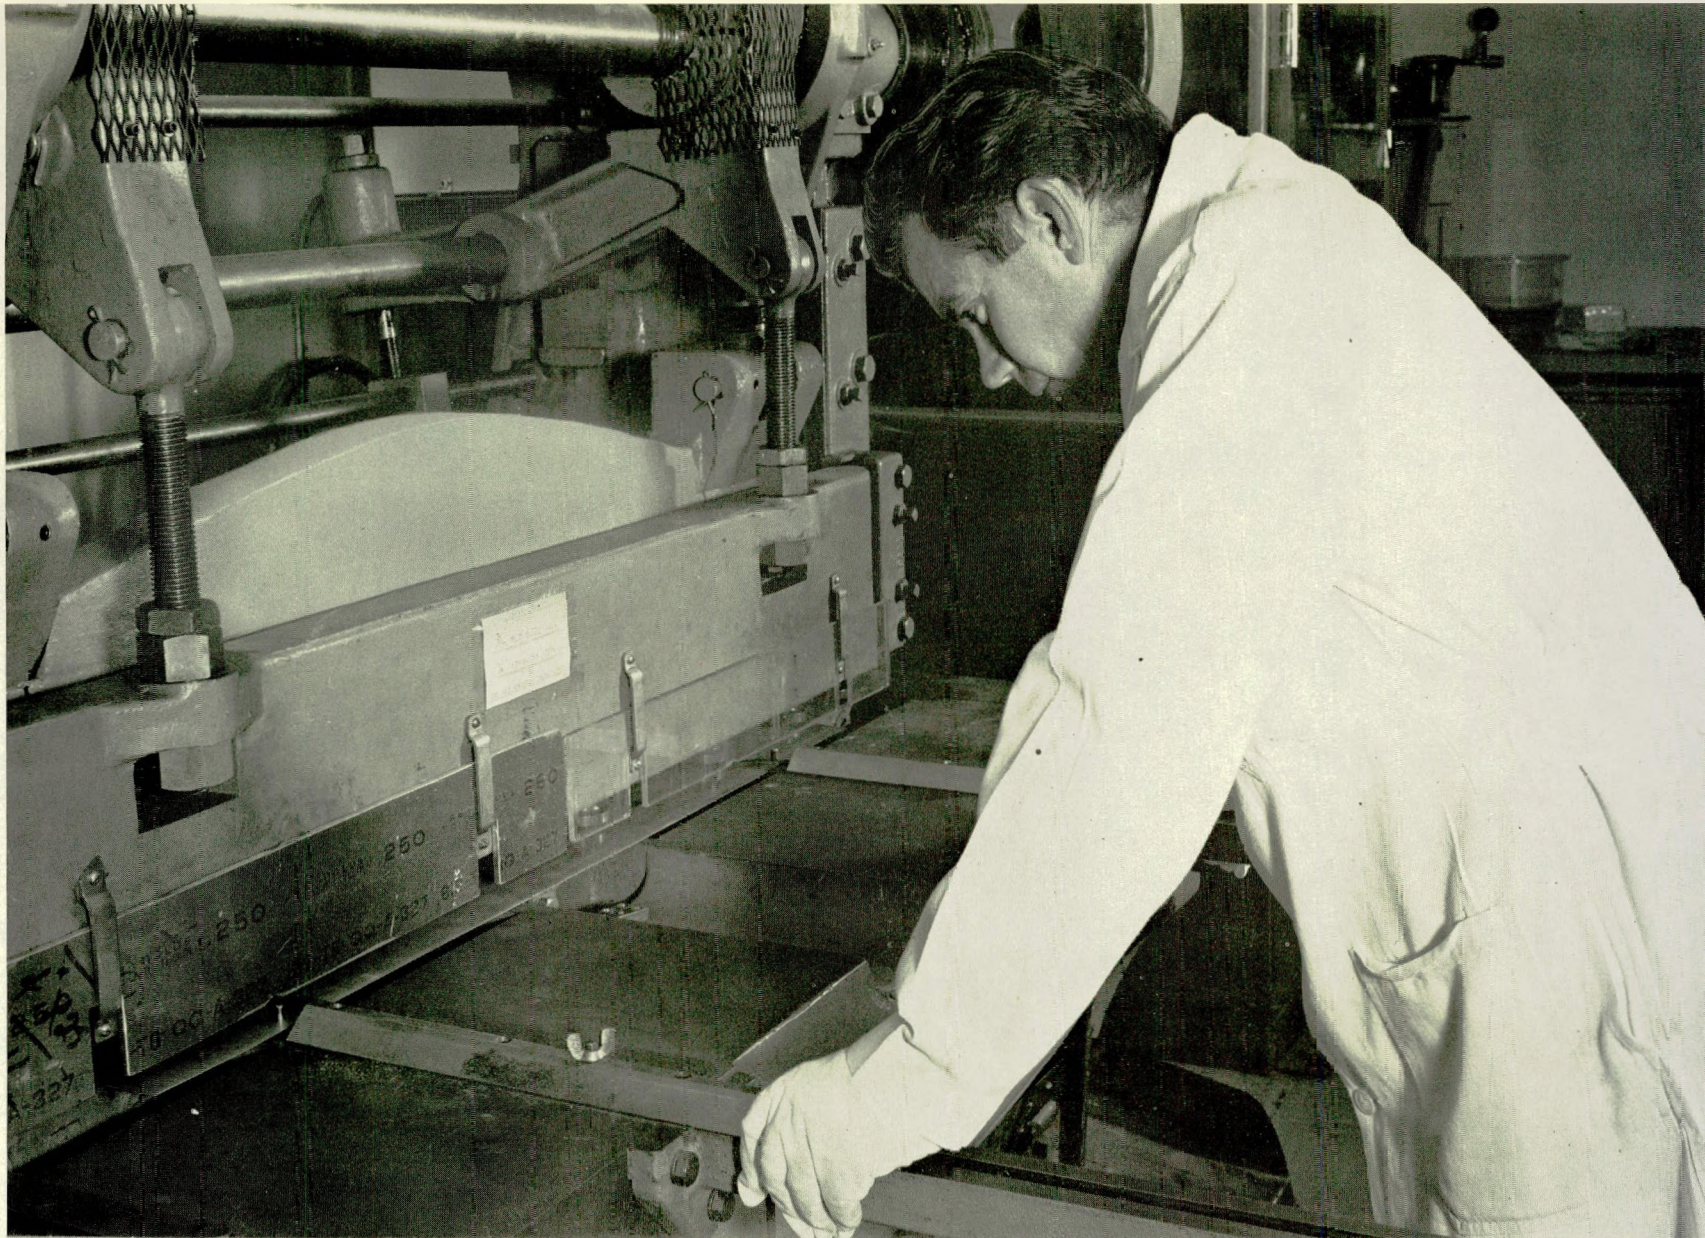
Shearing Fuel Plate to Pre-Machining Size
